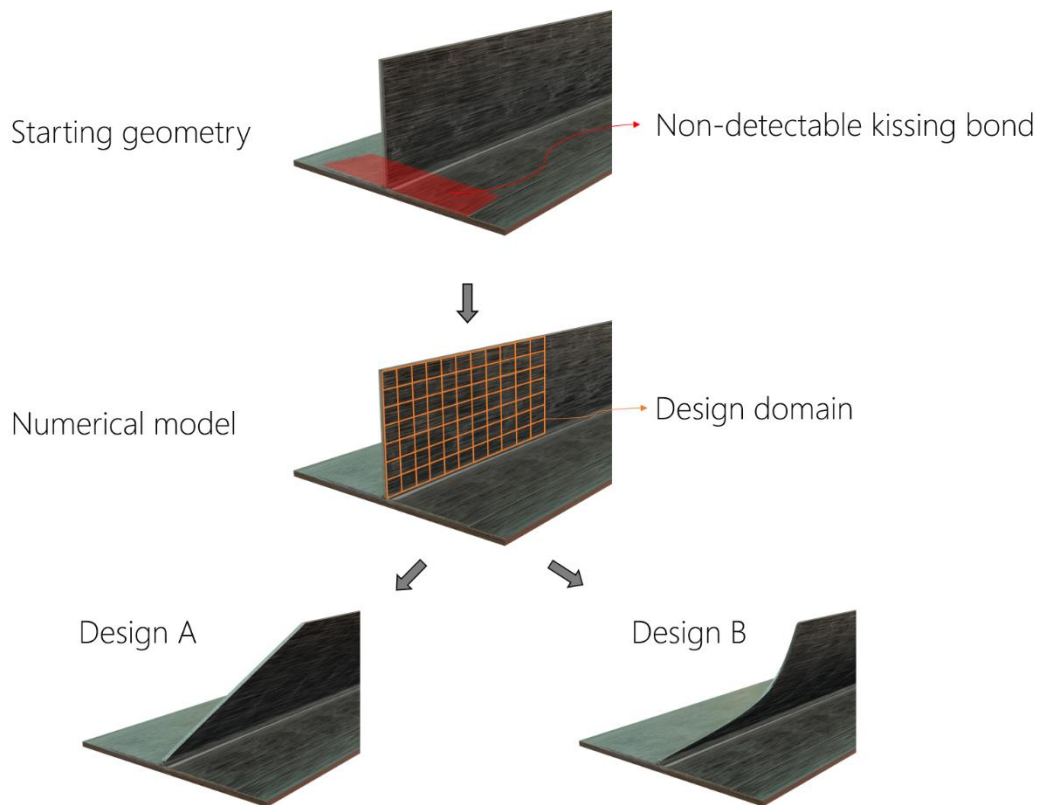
Optimisation concept of skin-stringer assembly with a kissing bond defect
